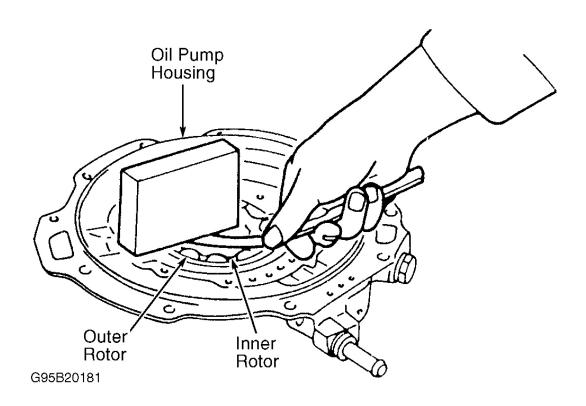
Measuring Rotor End Clearance Courtesy of MAZDA MOTORS CORP.
